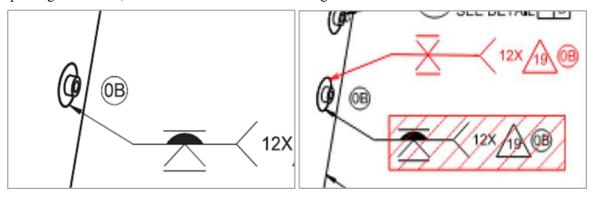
(Left) Weld symbol for a single-vee joint design and (right) redline weld symbol change to a double-vee joint design.
